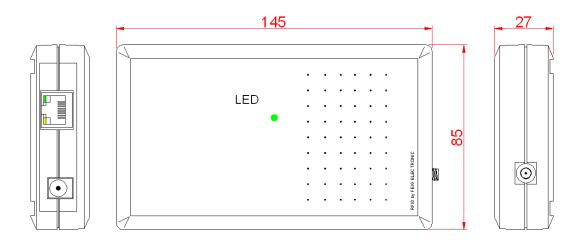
Dimensions of the housing version (all dimensions are in mm)
